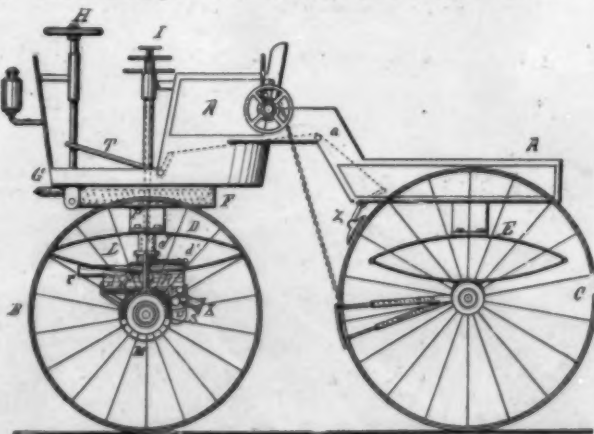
SIDE ELEVATION OF SELDEN CARRIAGE.
